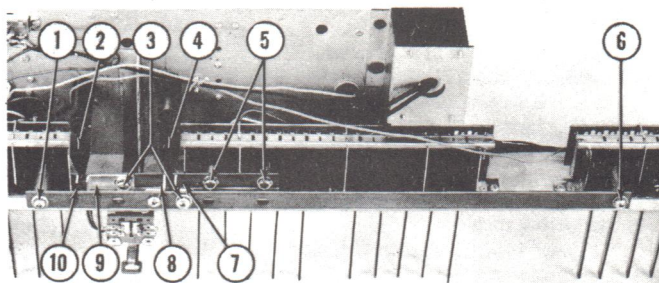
CONNECTOR LINK ADJUSTMENT - 2500
